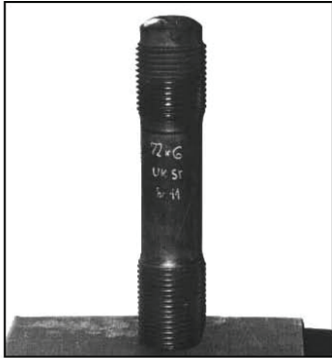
Bolt M 76X6 No 11 of inner casing of medium pressure turbine
